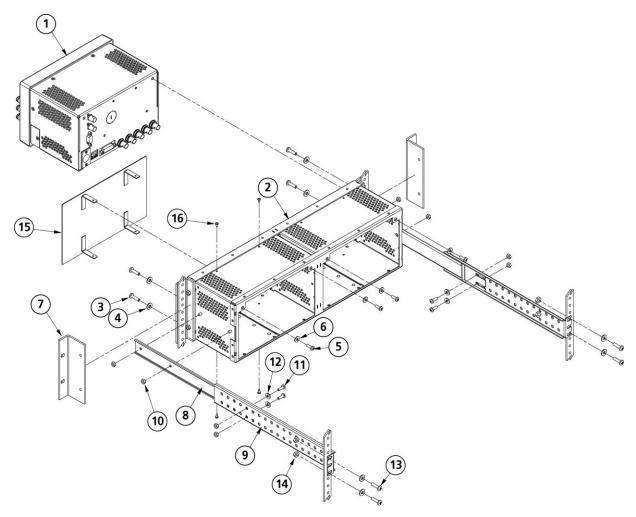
Mounting the CMN-91 in a Rack Using the DRC-3
